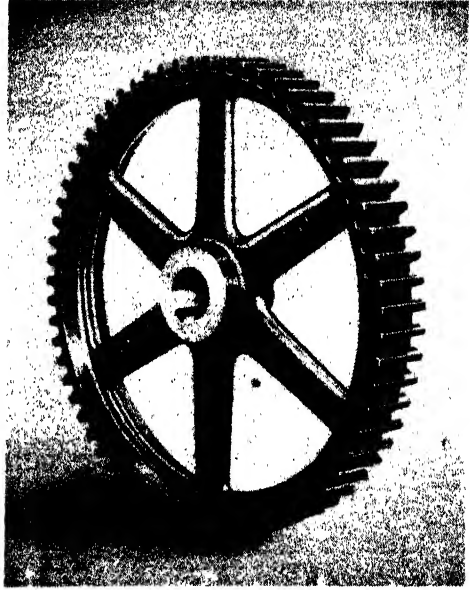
C. SPUR GEAR. (Courtesy W. A. Jones Foundry and Machine Co.)
